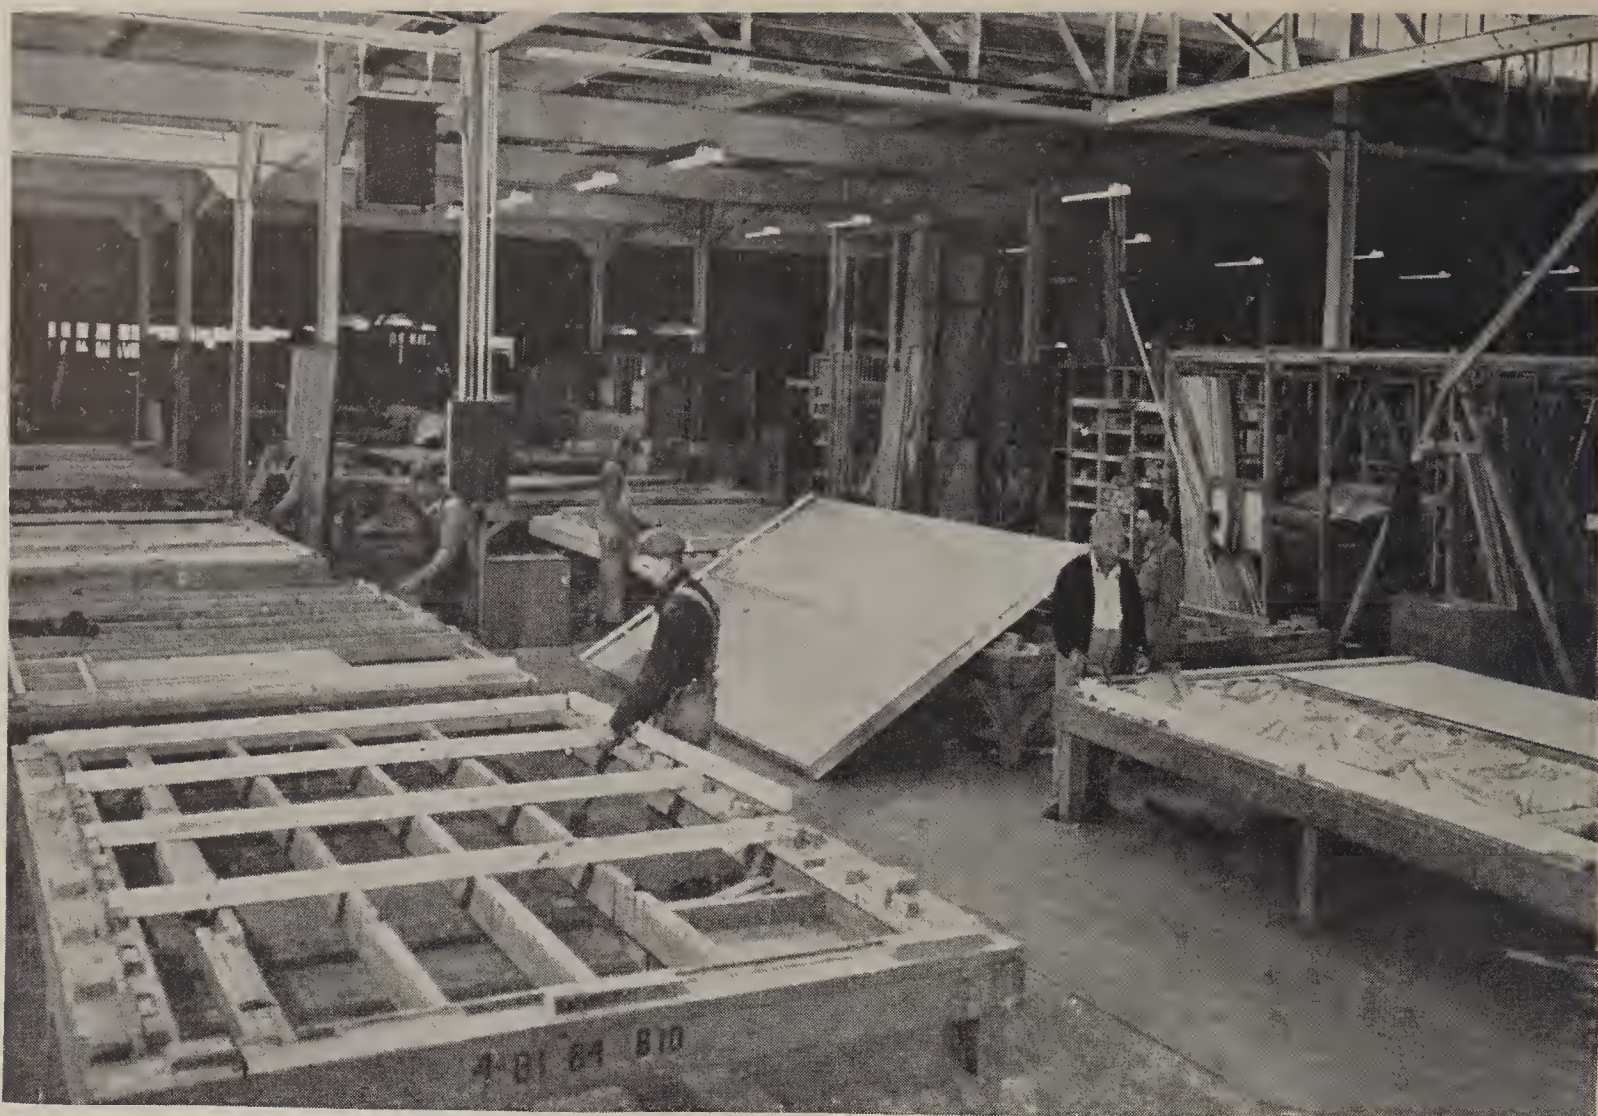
In-line jig setup. Left, framing jigs; right, tables for attachment of covers and insulation.
